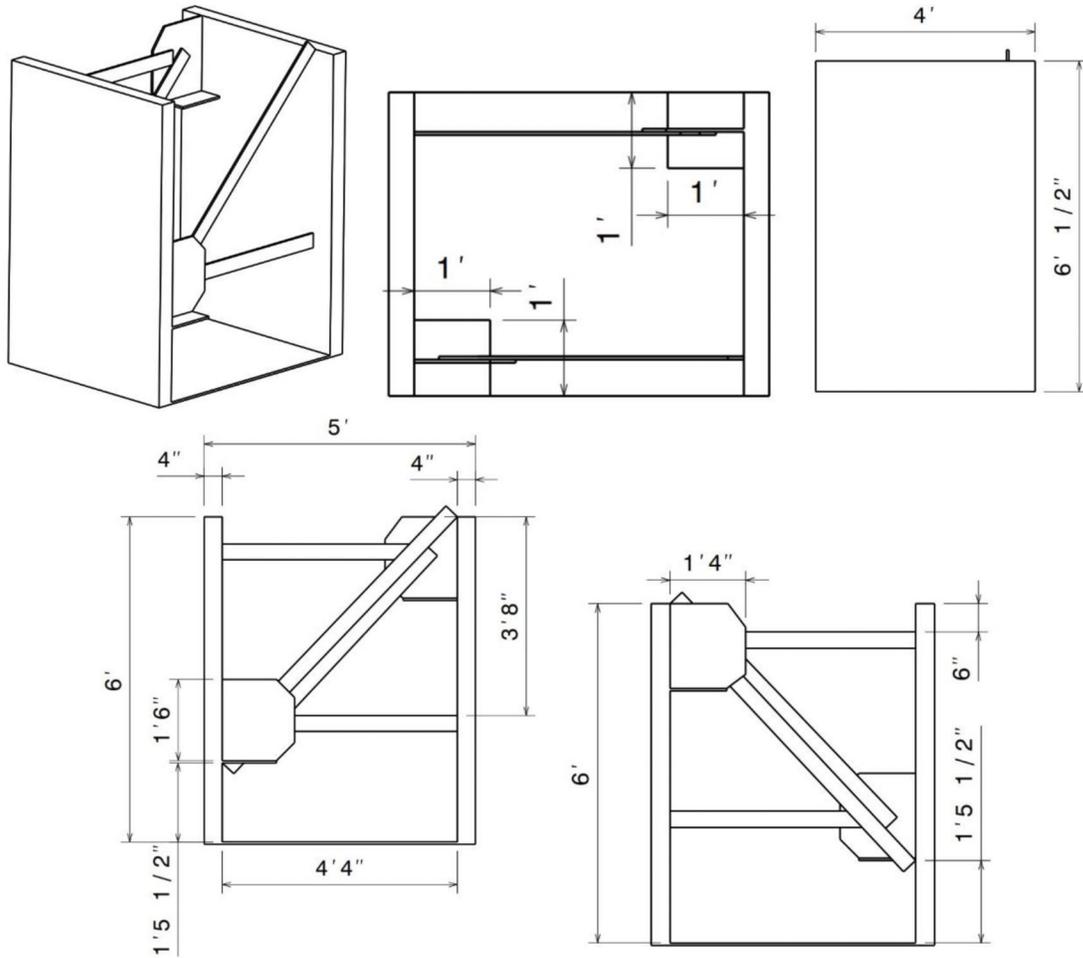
Isometric view, top view, side view, front view, and back view of Component 5.
